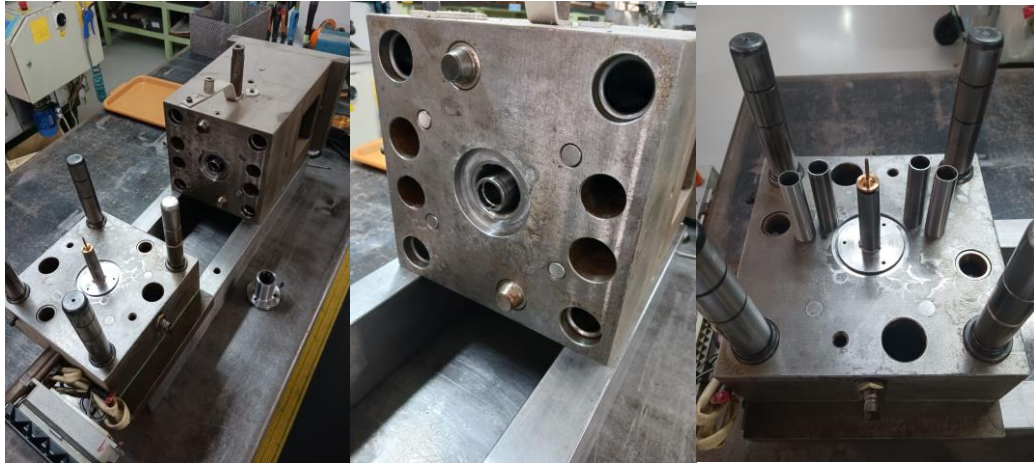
(a) 0509 mold, (b) movable half, (c) fix half.
